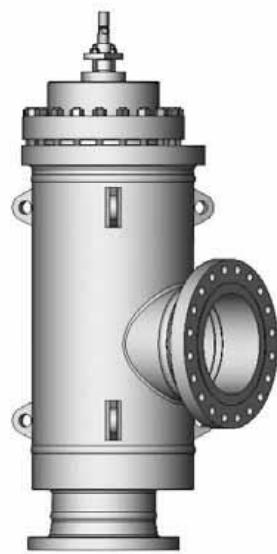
Reverse Double – Ported Globe Style Valve body
